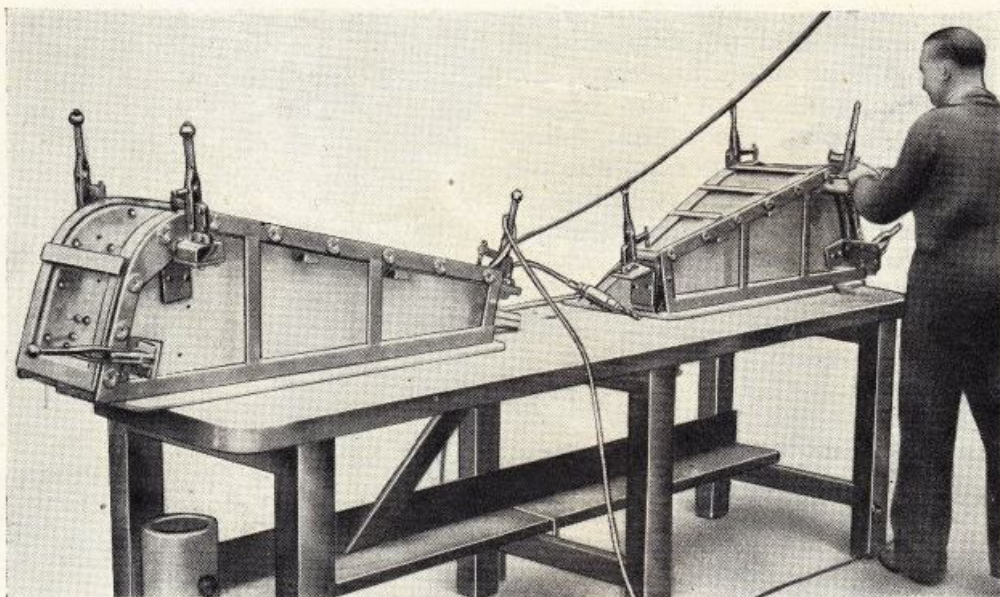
A Pair of Jigs of Opposite Hand for Drilling the Holes in the Flanges of the Mudguards. Portable Electric Tools are Employed
